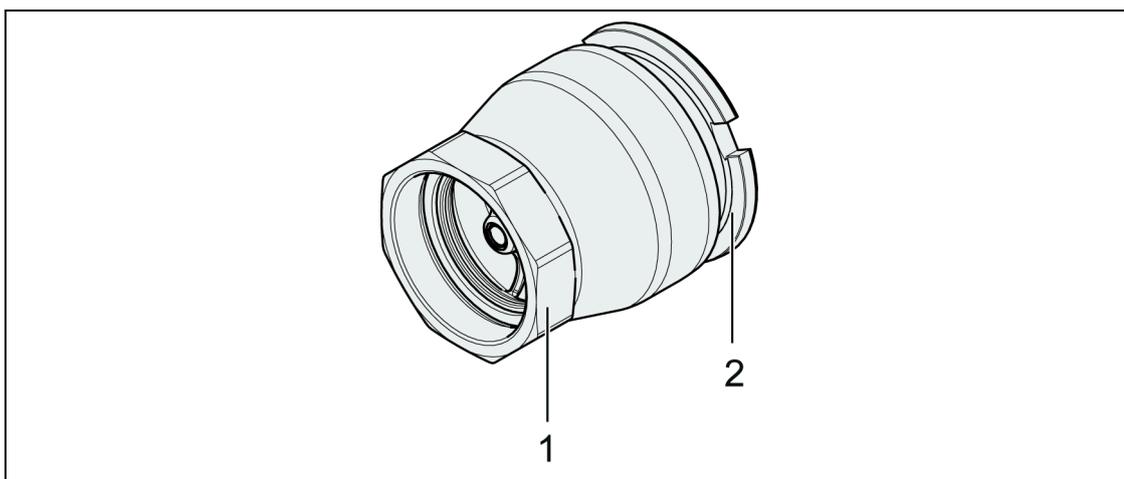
Design of dry disconnect coupling, tank unit (TU)
